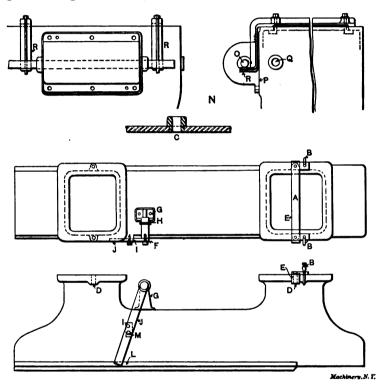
Special Gages and Templets for Laying-out and Aligning Operations on a Turret Lathe Bed
